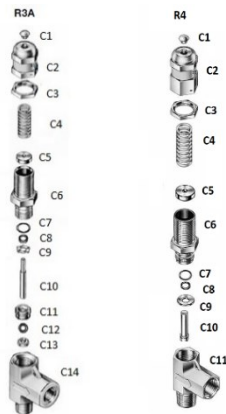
, Exploded view of the new valve (R3A series) vs existing valve (R4 series) [42]
